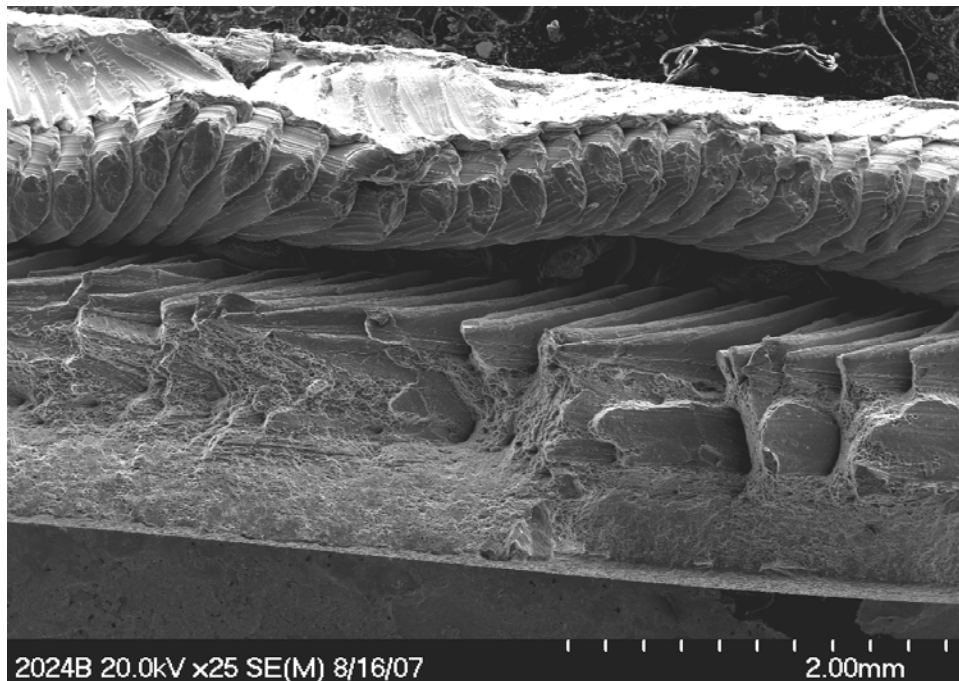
Scanning electron microscope image of fractured tensile sample of good weld at higher magnification
